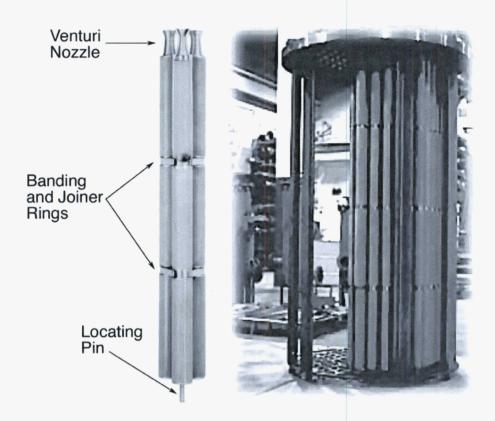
Pall PSS triad element design and filters in a tubesheet assembly.
